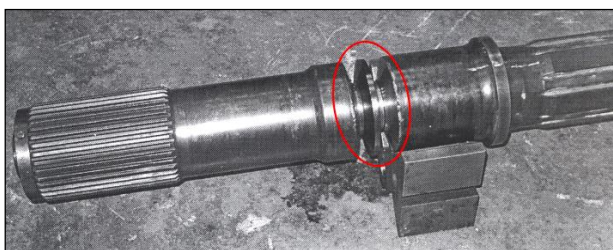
The fabricated adaptor inserted between the two pieces of the broken shaft
